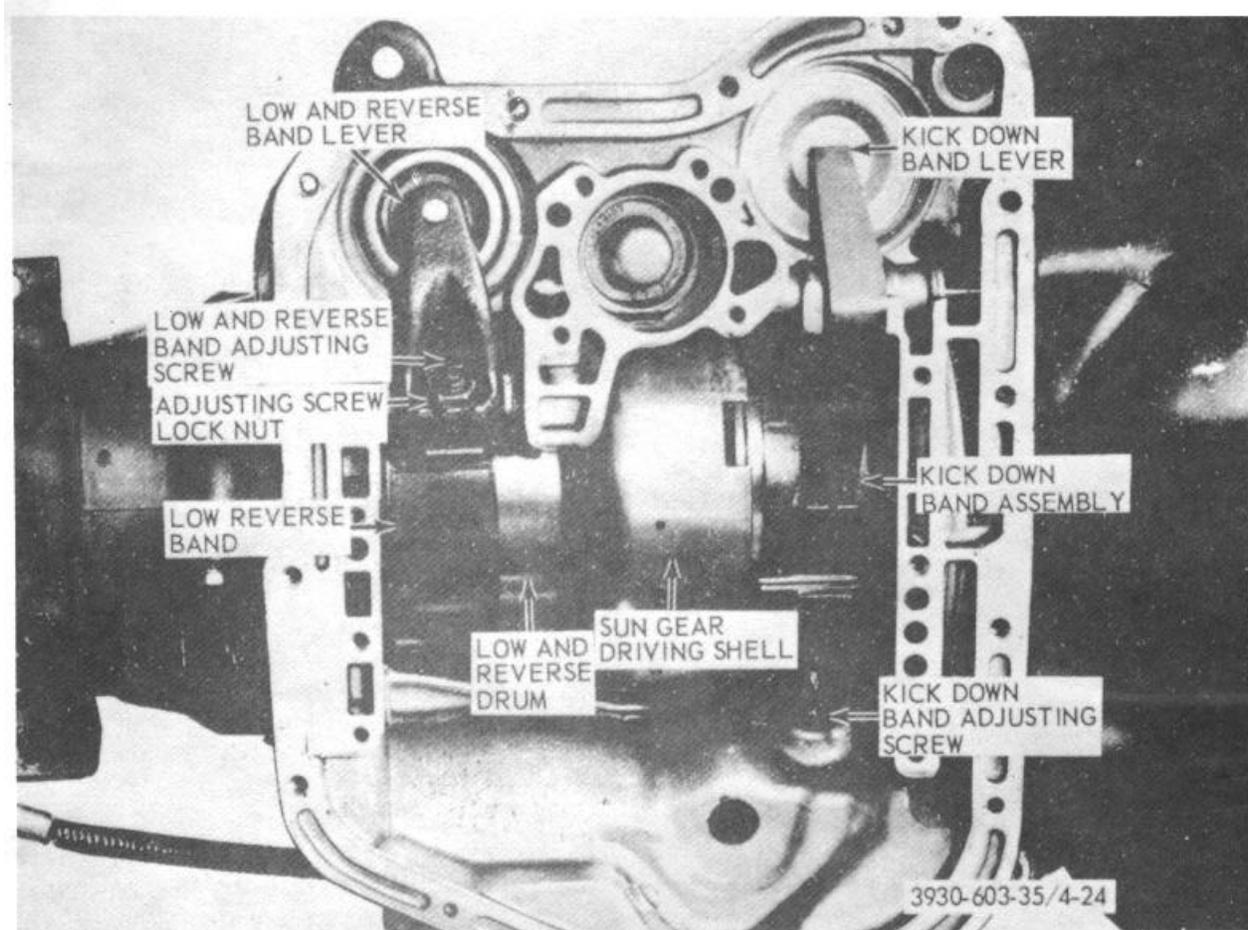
Transmission assembly, control valve removed, bottom view.
